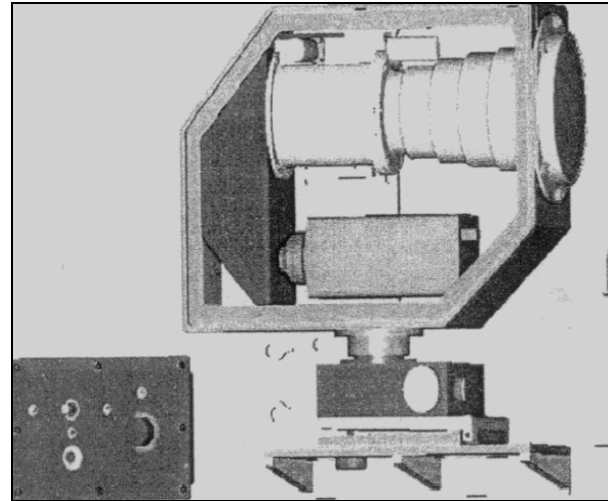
(a). Assembled LRT system in CAD model (Side cover open condition)
